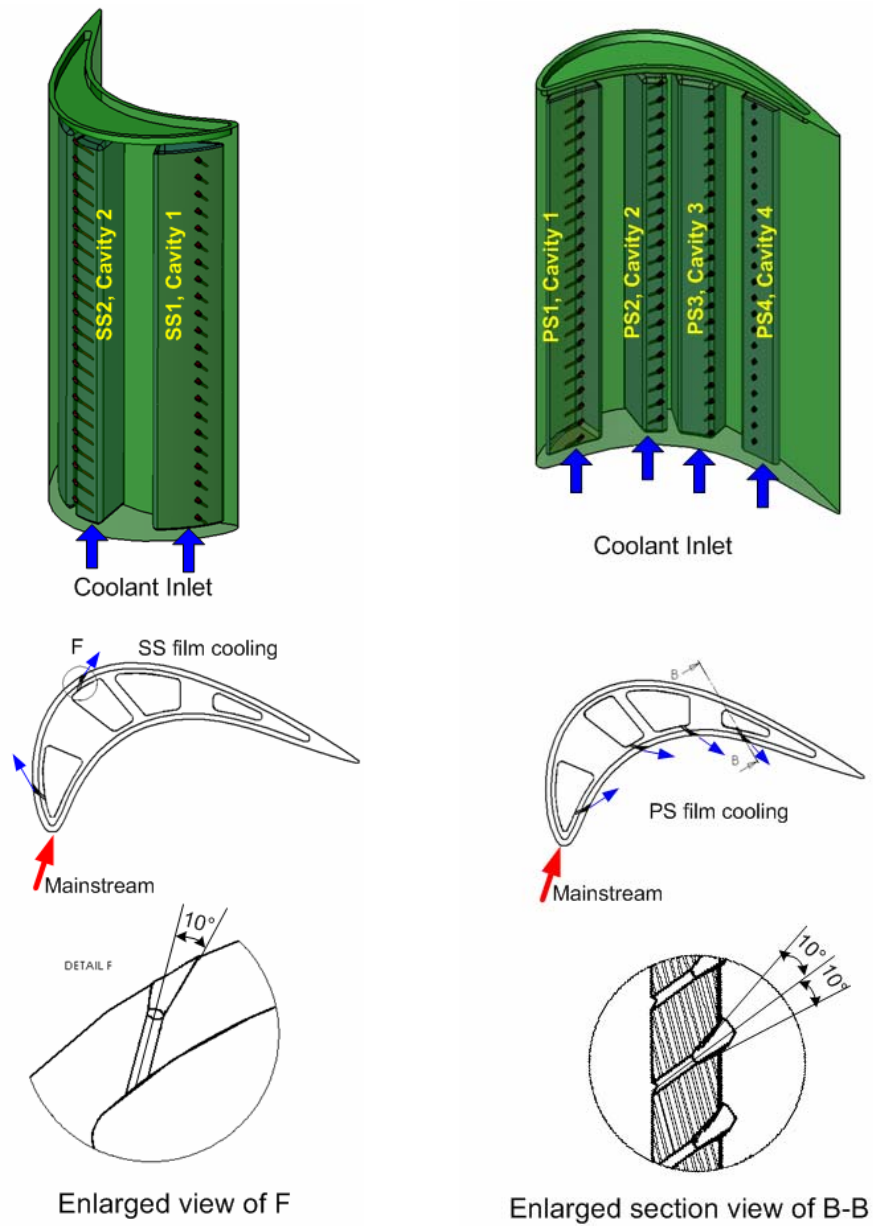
Film cooled blade with compound angle shaped holes (Blade 2)
